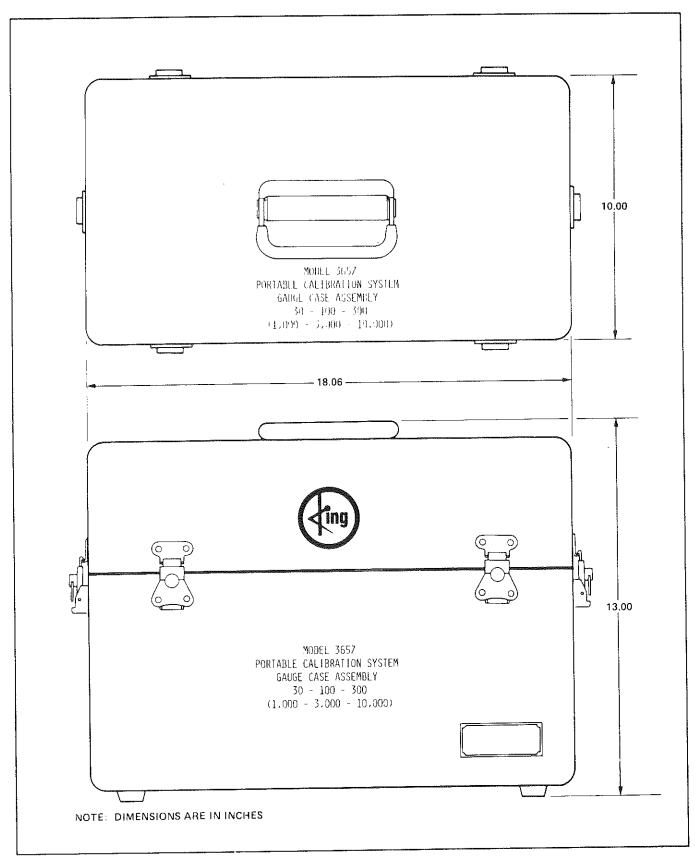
Installation Drawing — 30, 100, 300 Psig Gauge Case Assembly and 1000, 3000, 10,000 Psig Gauge Case Assembly
